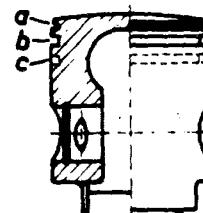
Ring groove positions at piston (a - L-ring groove; b - upper rectangular groove; c - lower rectangular groove projected)
